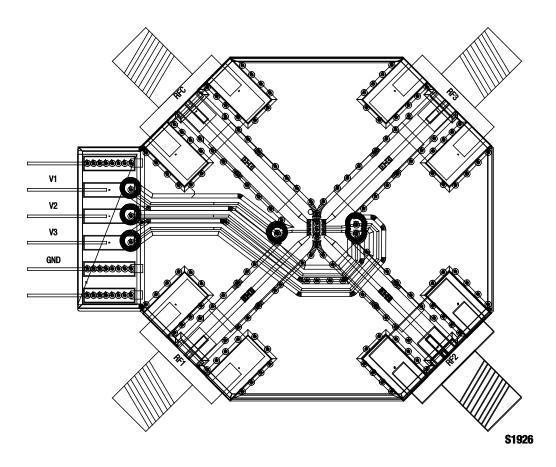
SKY13317-373LF Evaluation Board Assembly Diagram
